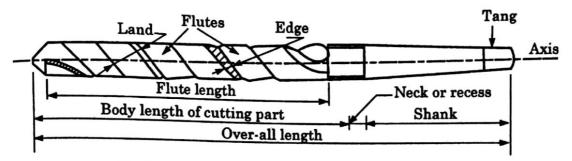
Twist Drill (Shown with its Principal Parts)
